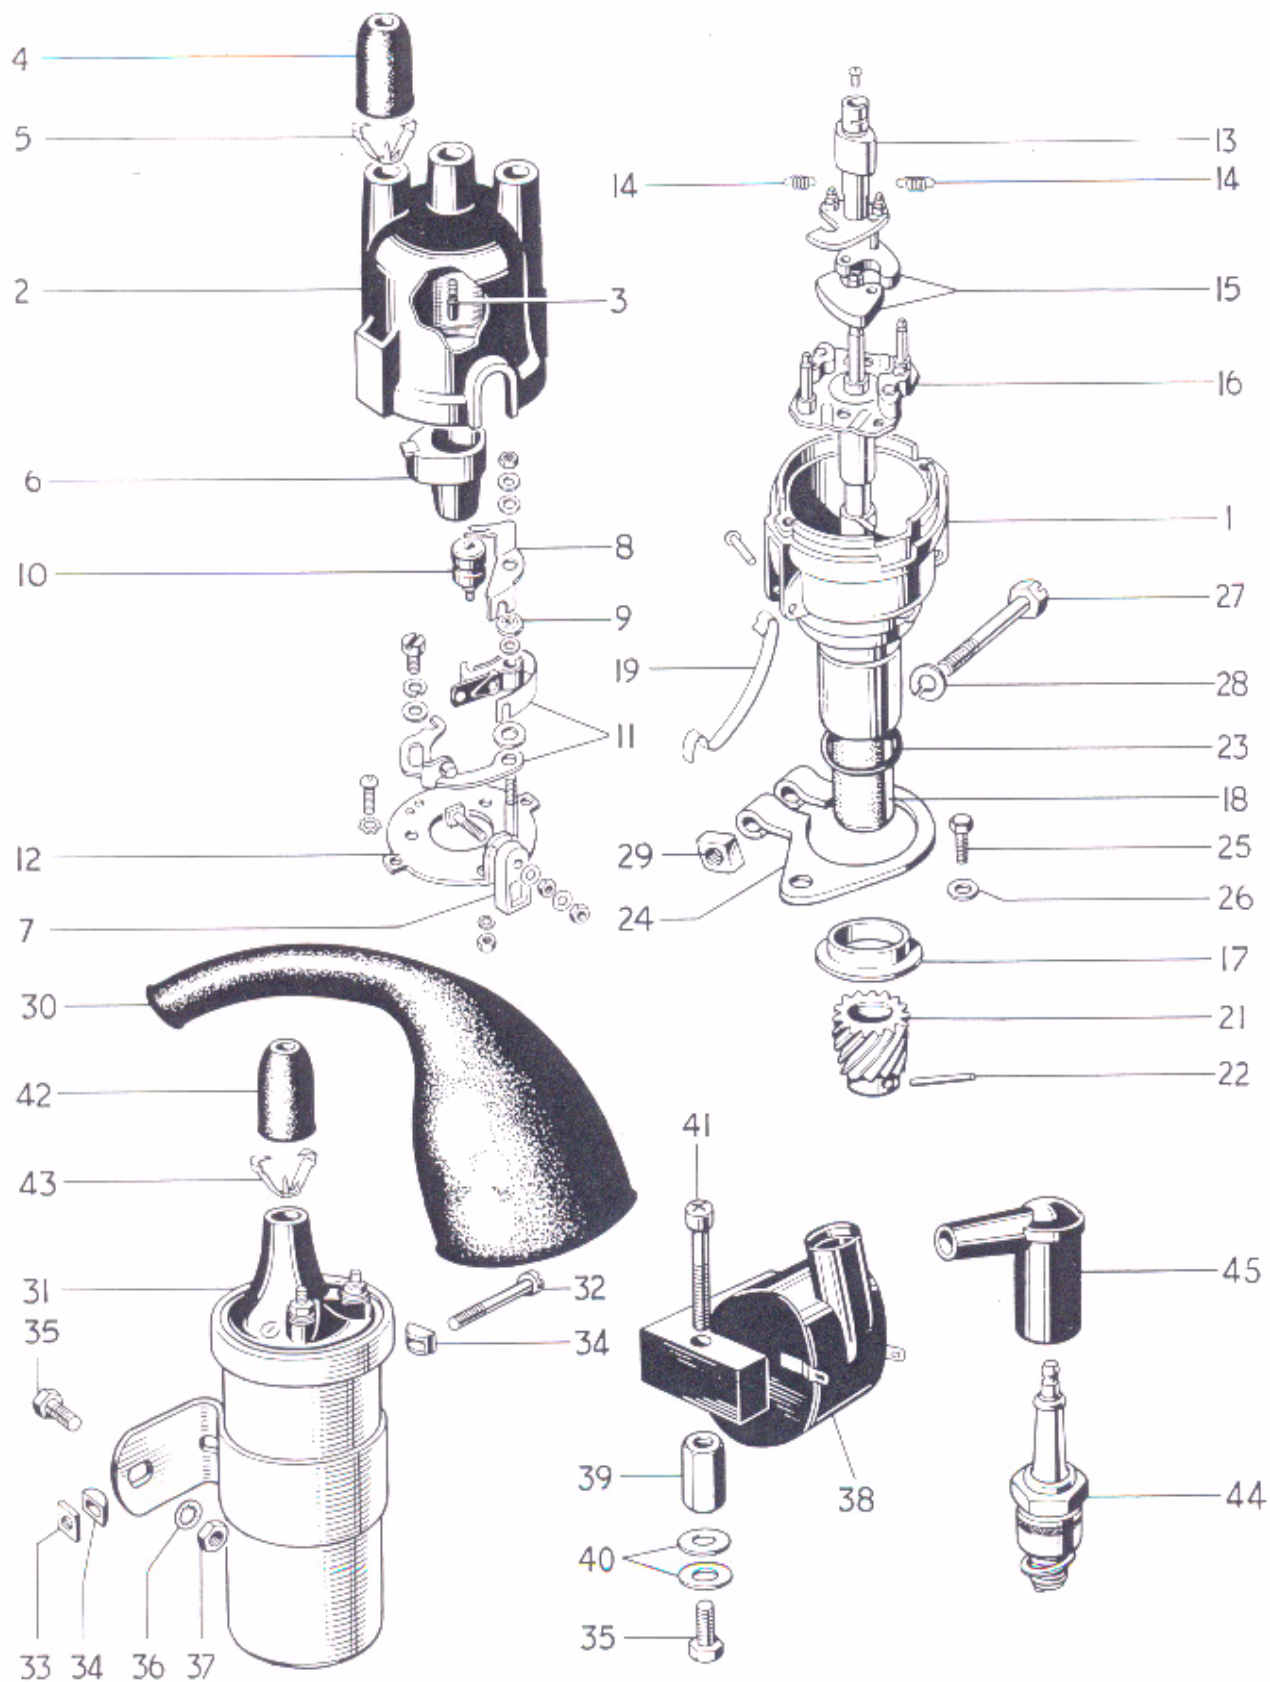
DISTRIBUTOR, COIL AND SPARK PLUGS.
